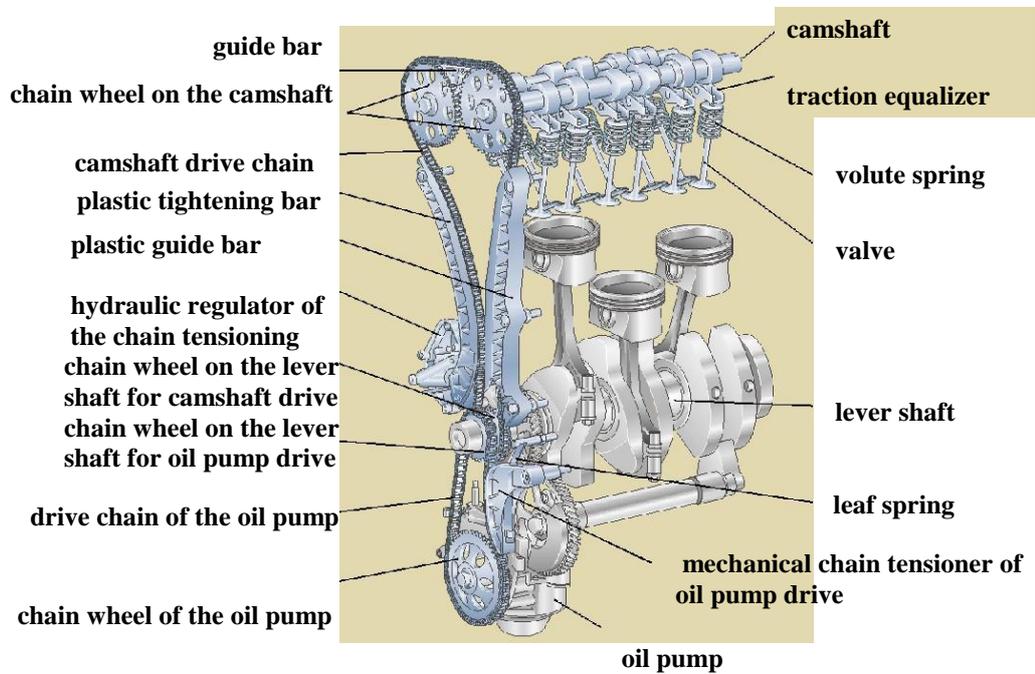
Skoda's cam drive and oil pump drive of the 4-valve engine
